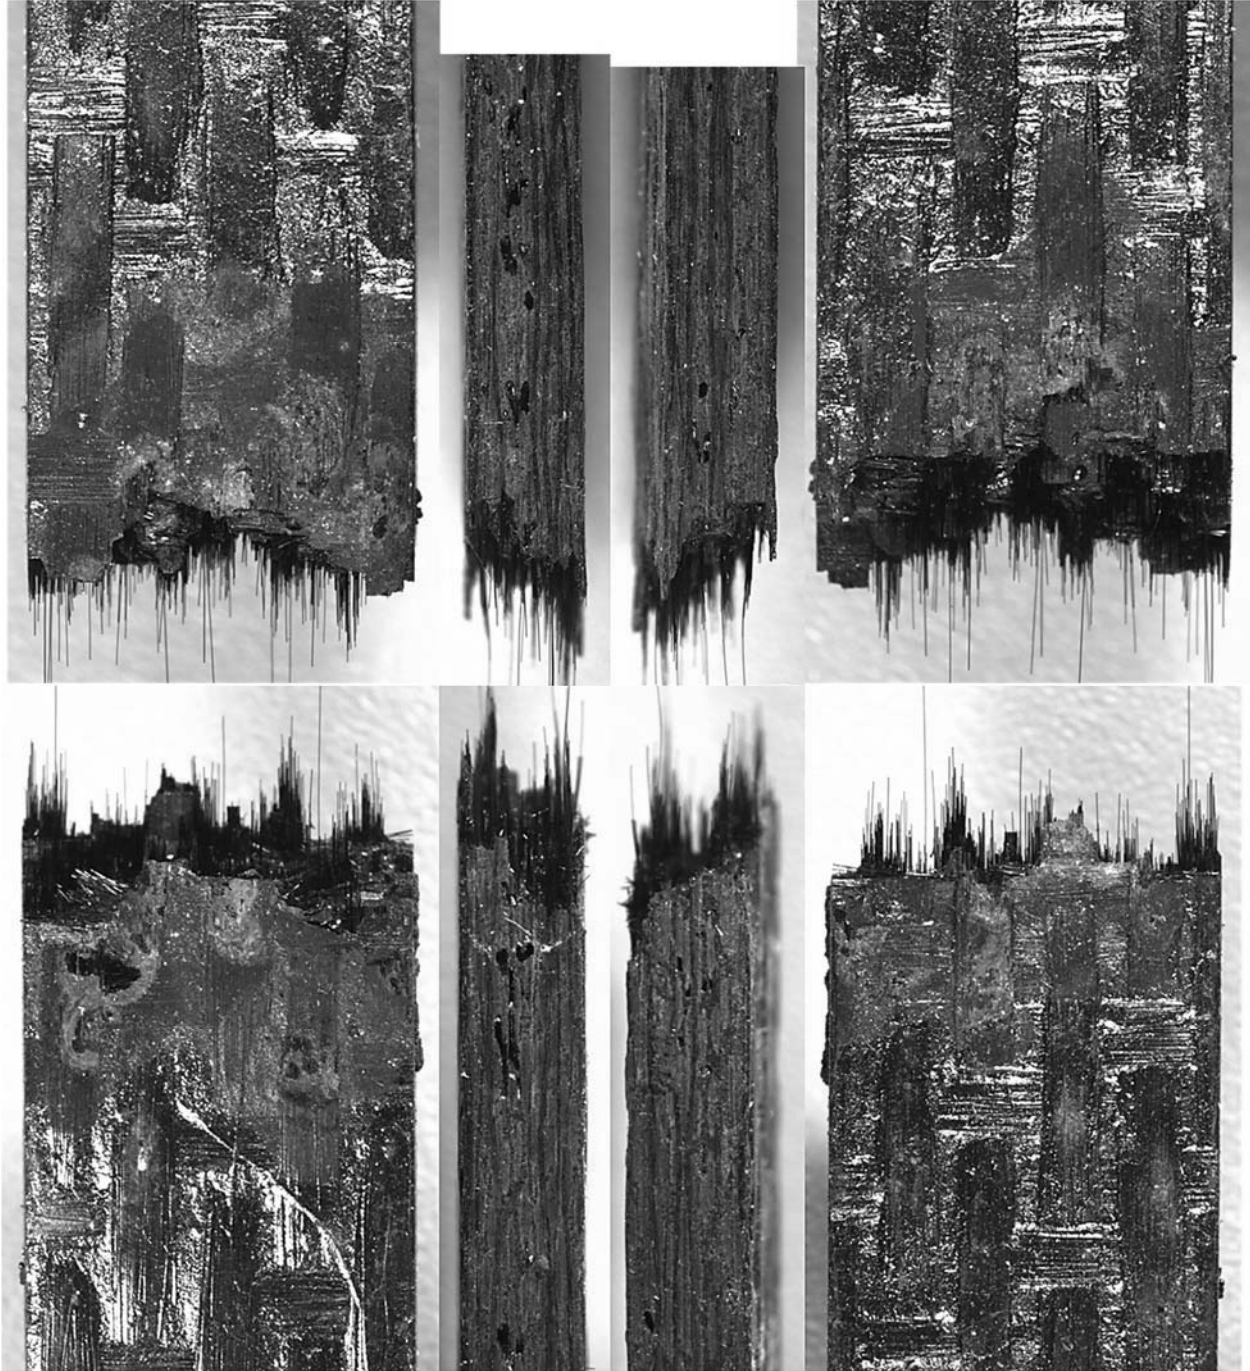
Top and bottom fracture surfaces of specimen 16-044, tested in fatigue to failure at 1200°C in air. $\sigma_{\max} = 130$ MPa, $N_f=4,506$. Specimen was used as the temperature calibrator prior to fatigue testing
